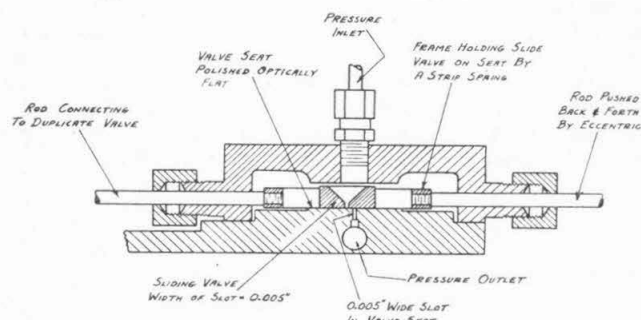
CONSTRUCTION OF SLIDE VALVE
